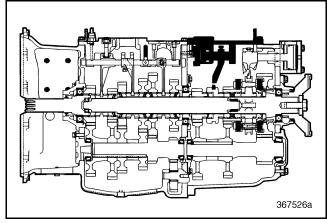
Rear Case Shift Cover Locator (T313L/T318L Shown)
